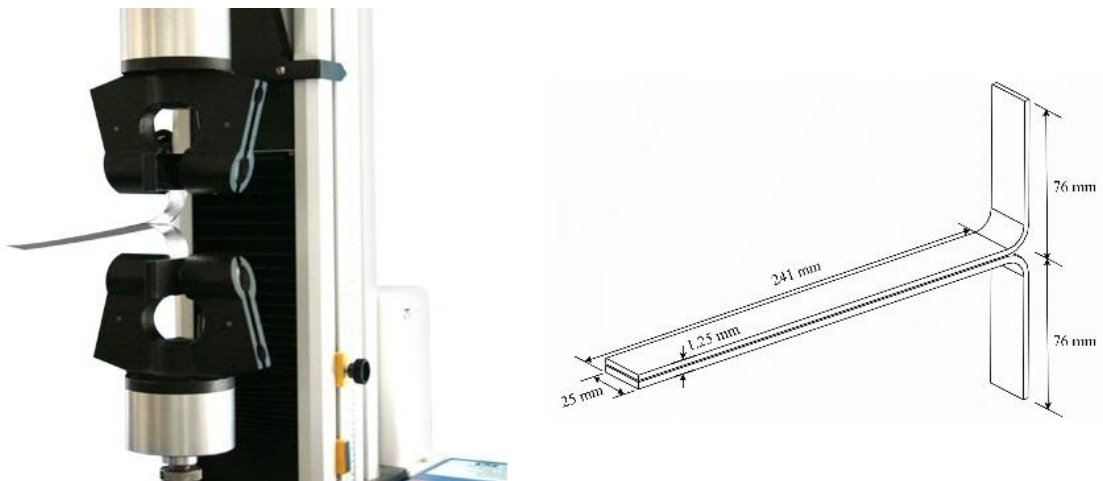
Side view of the adhesive t-peel resistance testing device and geometrical details of the test specimen. (admet.com)
